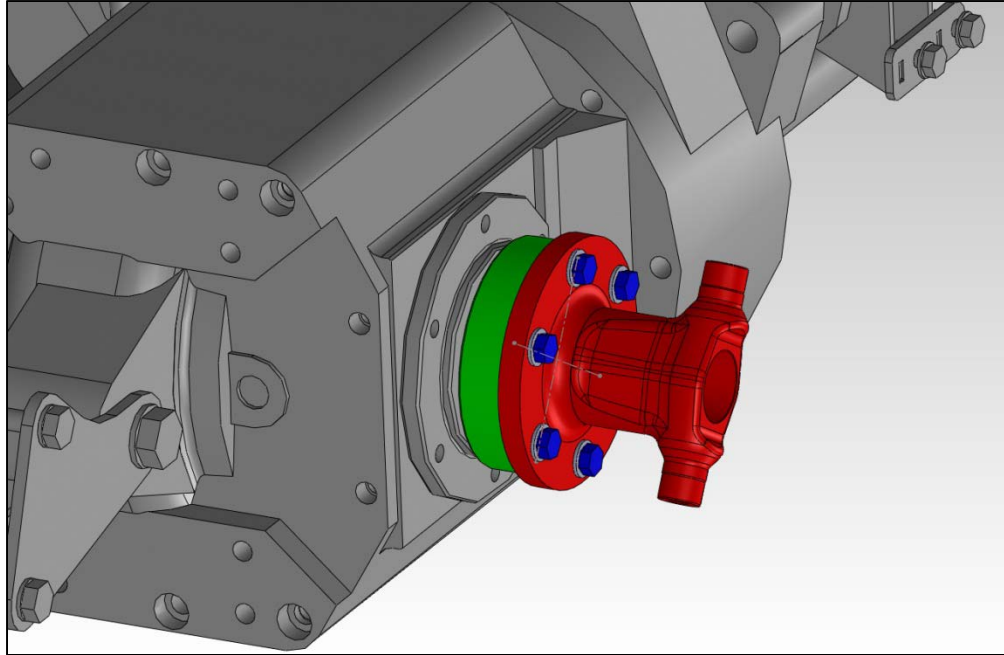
Inner Joint to Transfer Case Bolted Assembly
